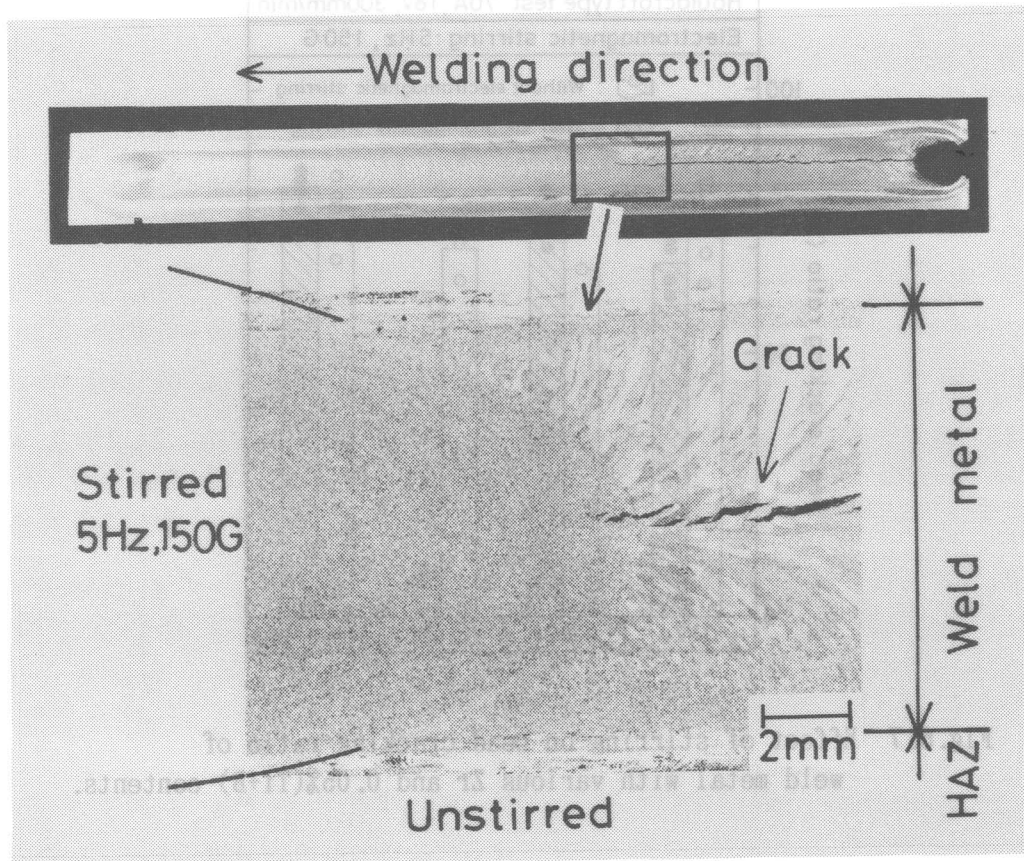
Macrostructural change of weld metal caused by stirring applied on the way of welding.
